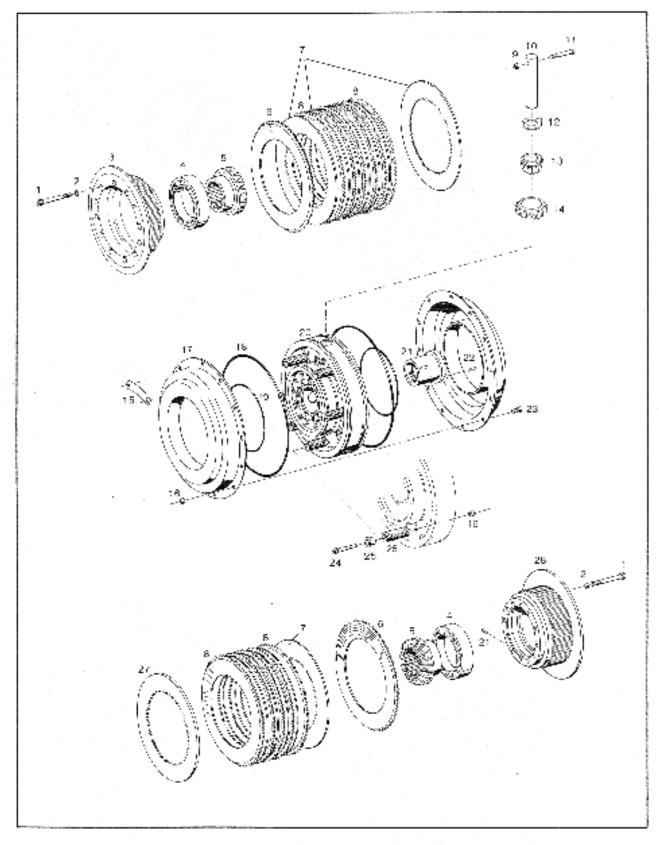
"HY" - 28000 Clutch and Gear Carrier Assembly
